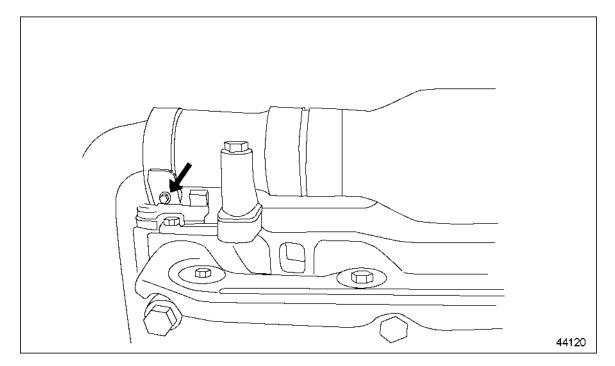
Removing or Installing Positioning Clamp to Throttle Inlet Pipe
